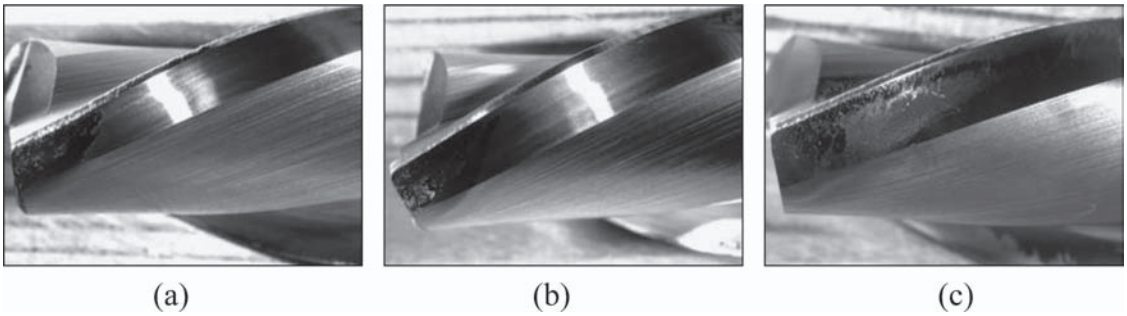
Tungsten carbide tools after cutting at (a) -6.7°C , (b) 4.4°C , and (c) 21°C .
